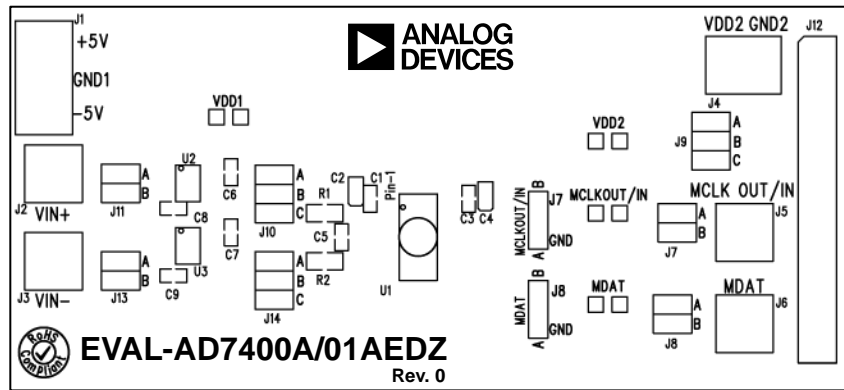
Silkscreen for the EVAL-AD7400A, 8-Lead Surface-Mount PDIP Packages with Gull Wing Leads
